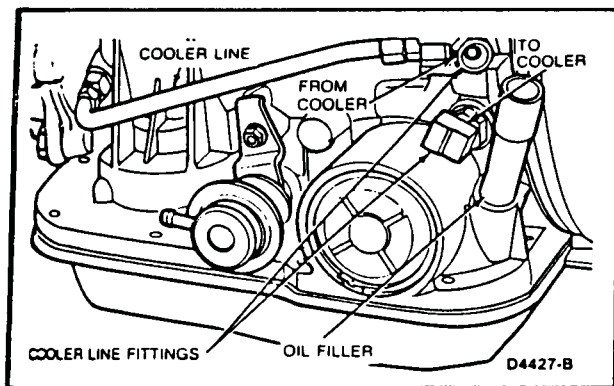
Oil Cooler Line Fittings and Oil Filler Tube
